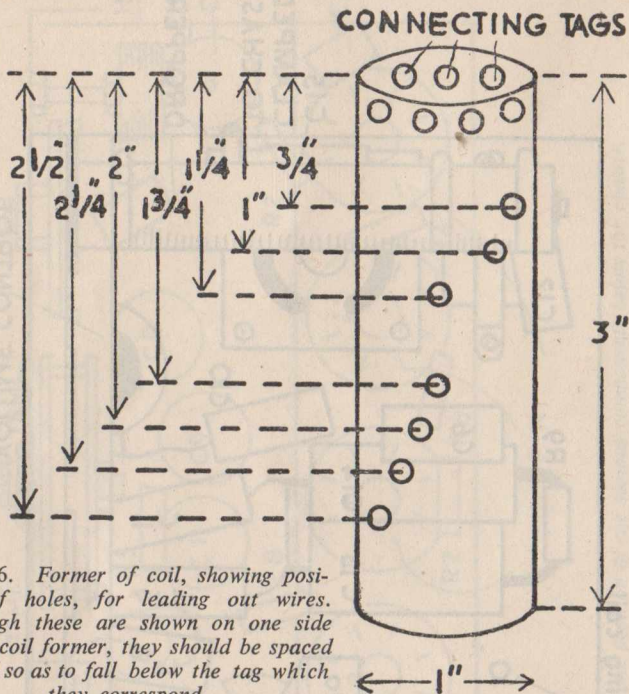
Former of coil, showing position of holes, for leading out wires. Although these are shown on one side of the coil former, they should be spaced around so as to fall below the tag which they correspond.
